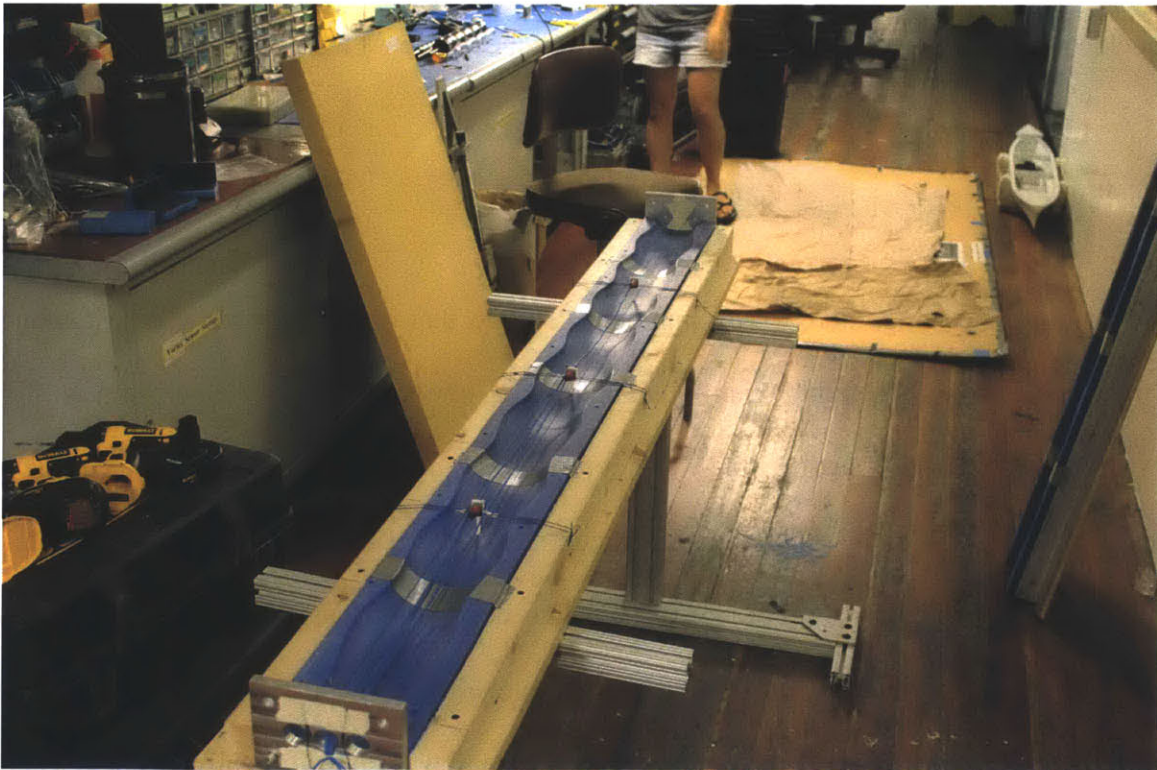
One half of the mold with end brackets and accelerometers mounted in preparation for casting. Each gap between blocks is covered with duct tape.
